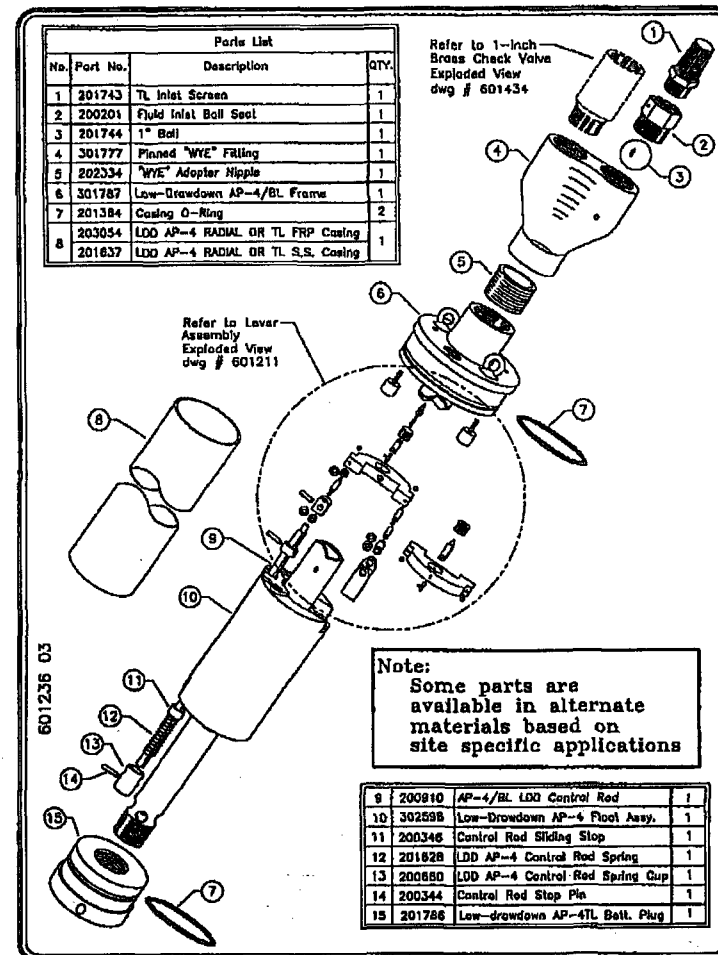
Exploded View of LDD Top-Loading AutoPump AP-4
